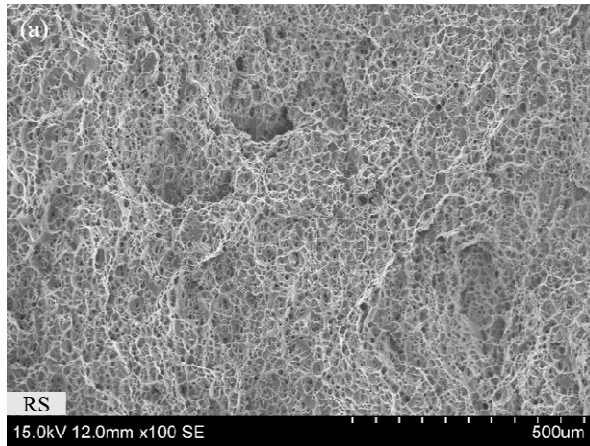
Fracture surfaces of FSW-20 sample showing failure in the HAZ of RS.
